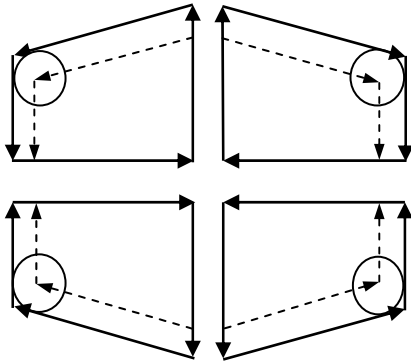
Offset direction of tool nose radius compensation in G90
